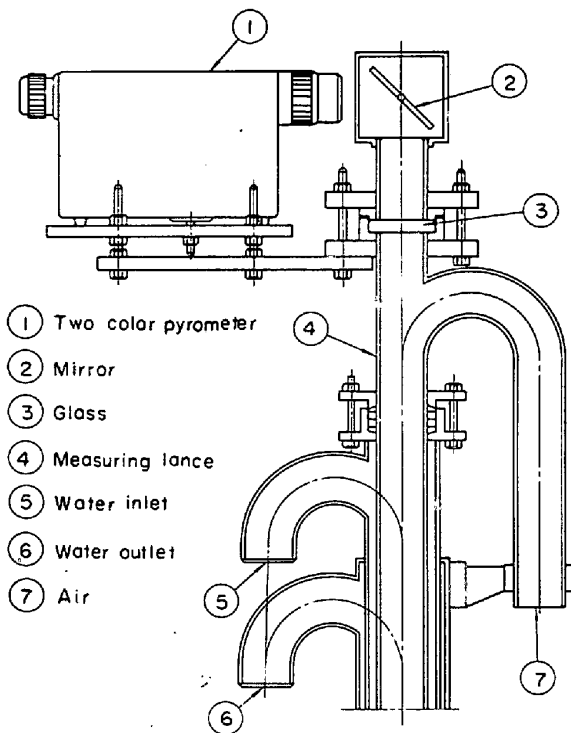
Sectional view of mounting a two color pyrometer on a measuring lance.
